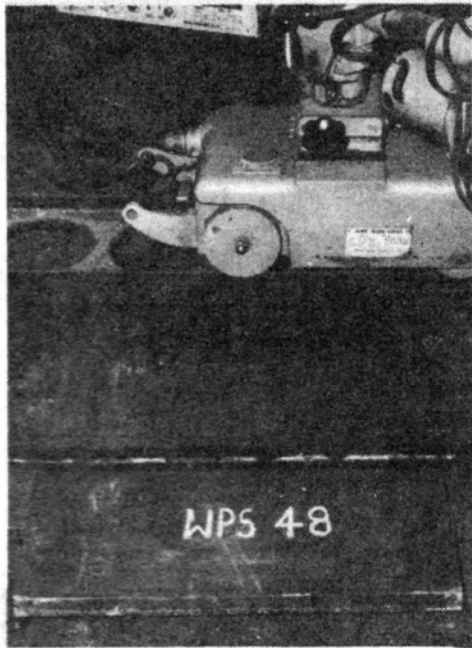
Submerged ARC one side FAB Welded Plate (bottom side).
